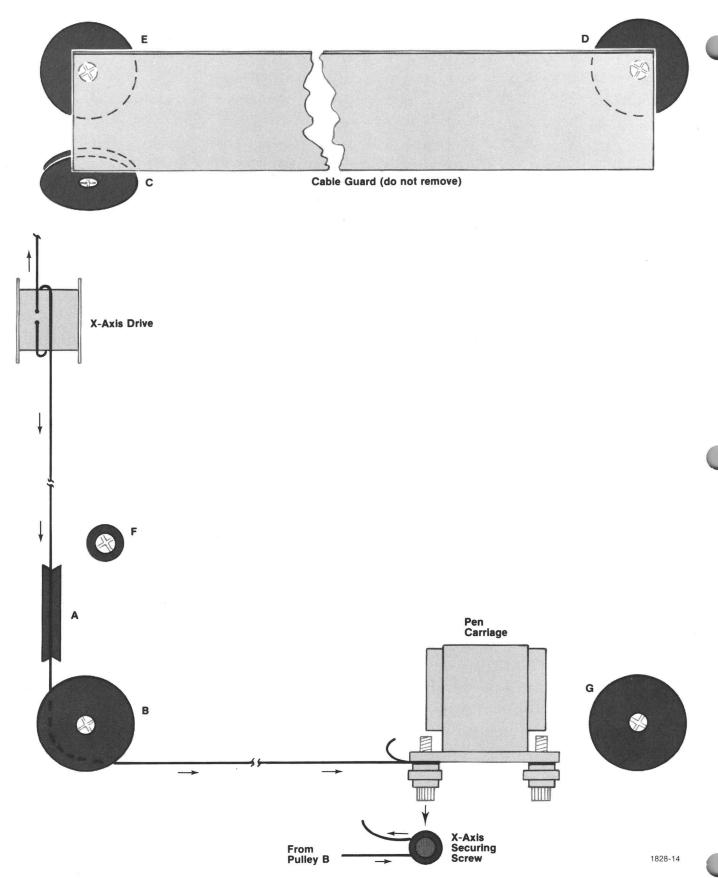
X-Axis Cable Stringing—Part 1.
